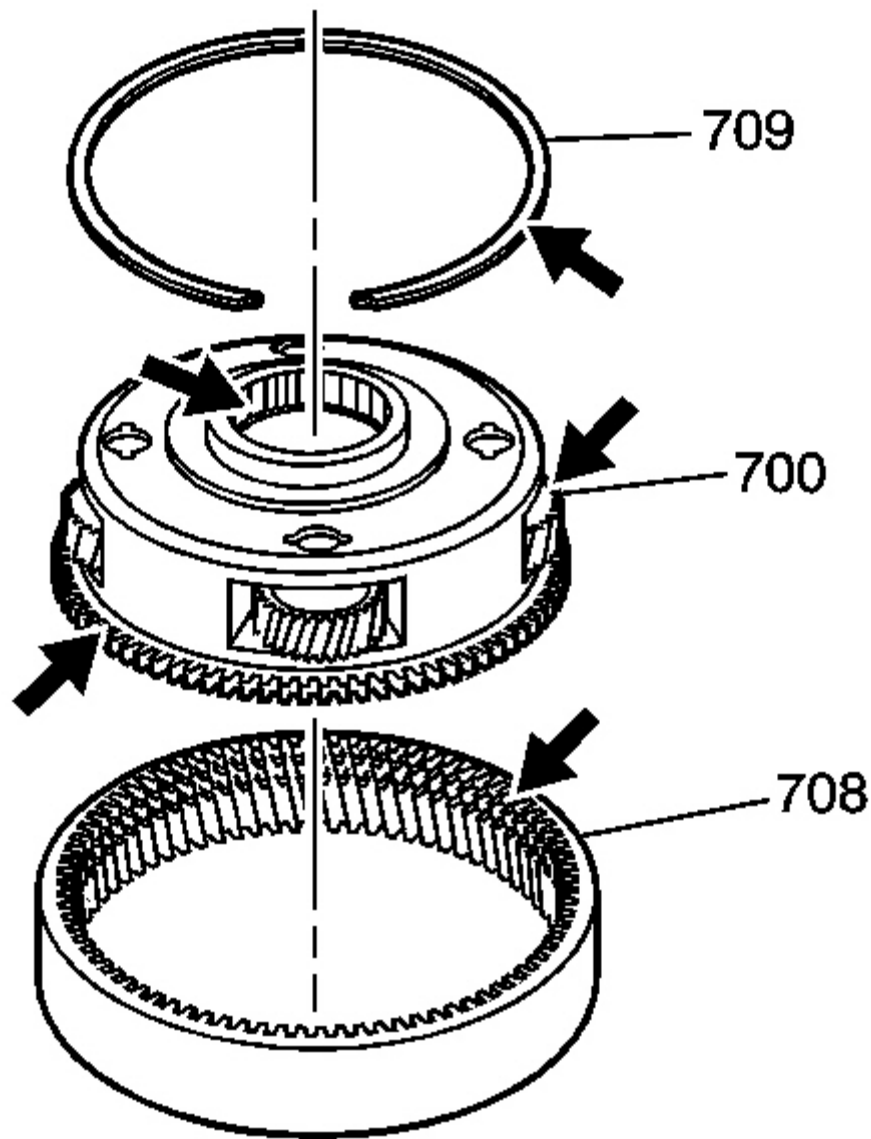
Inspecting Input Carrier Pinions, Reaction Internal Gear & Snap Ring For Damage
